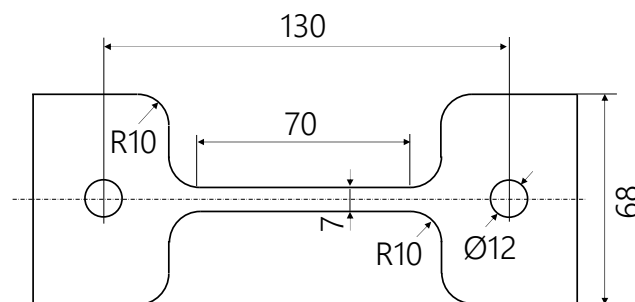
SENT sample geometry for a preliminary fracture mechanics test cut by a water jet.
